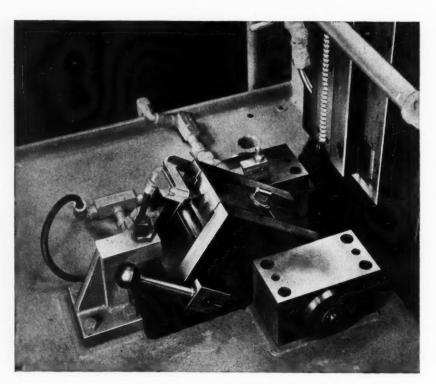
Fixture Designed to Hold a Rotor Blade while Broaching a Semicircular Contour at Root of Blade
